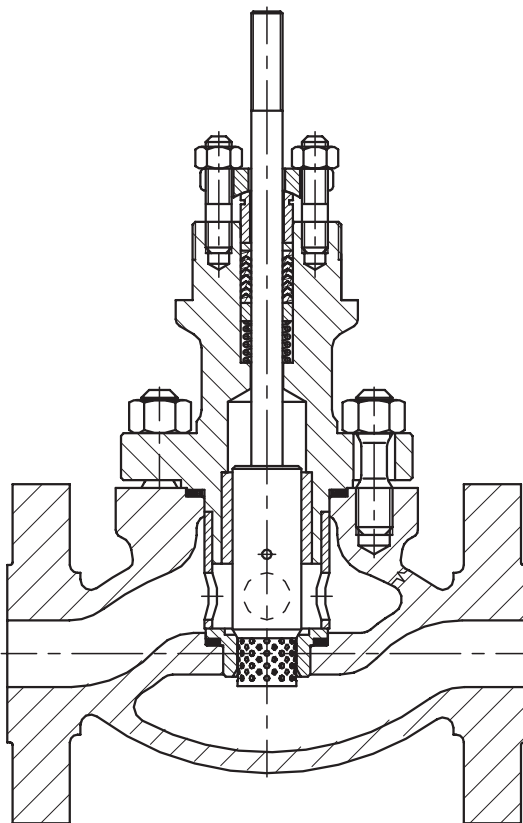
Valve Z1A - perforated valve plug and compression cage.
